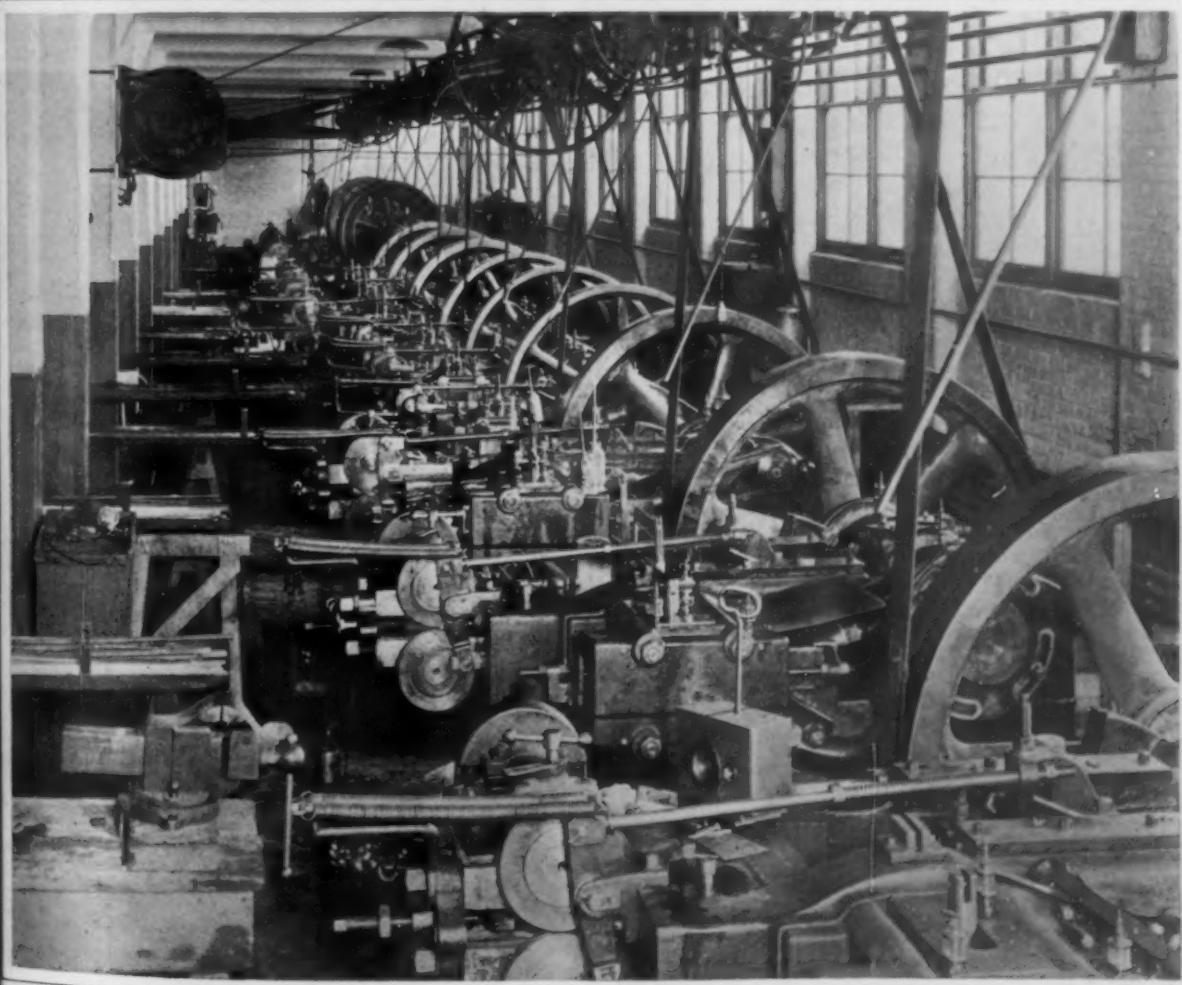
View on First Floor Showing Waterbury Farrel Foundry & Machine Company's Heading Machines
